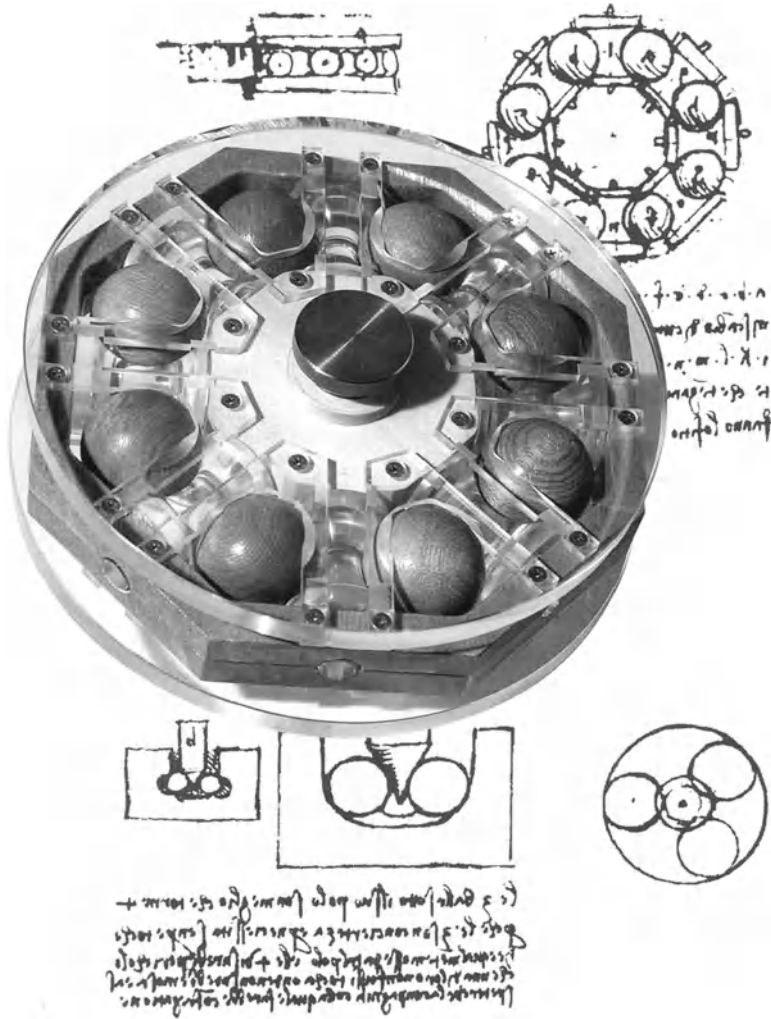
Drawings of Leonardo utilized as “constructive drawings” for the construction (Tsuboi 1996) of an axial roll bearing
